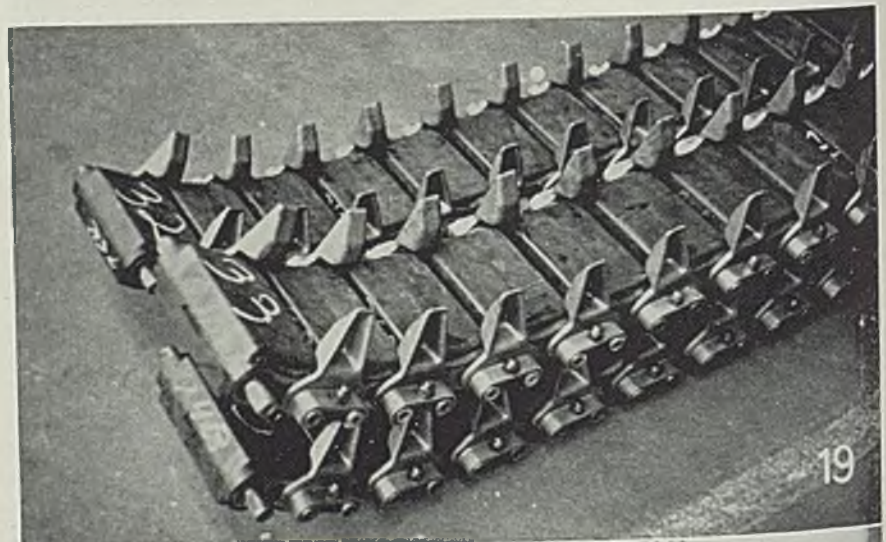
Close-up view of continuous track as assembled ready to be applied to the tank. One sprocket wheel drives the inside edge of the track, a second driving the outside edge. Both sprockets drive the track through the links joining the sections of rubber block
